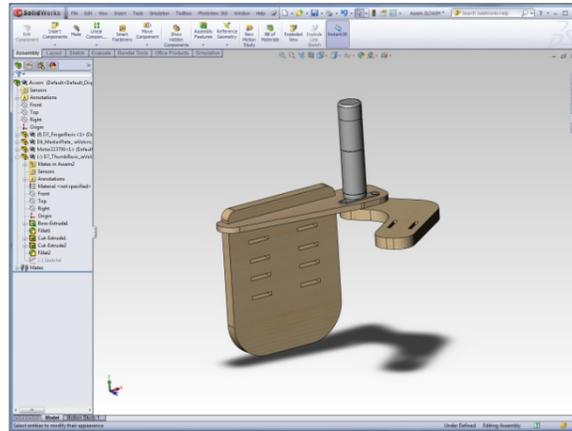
, SolidWorks Drawing of I/O device created by Elizabeth Fedalei
